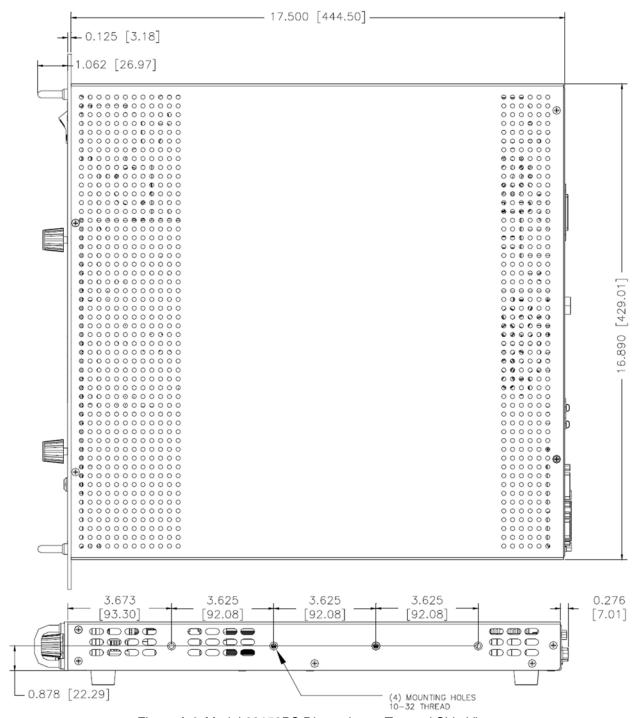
Model 08150PS Dimensions - Top and Side Views
